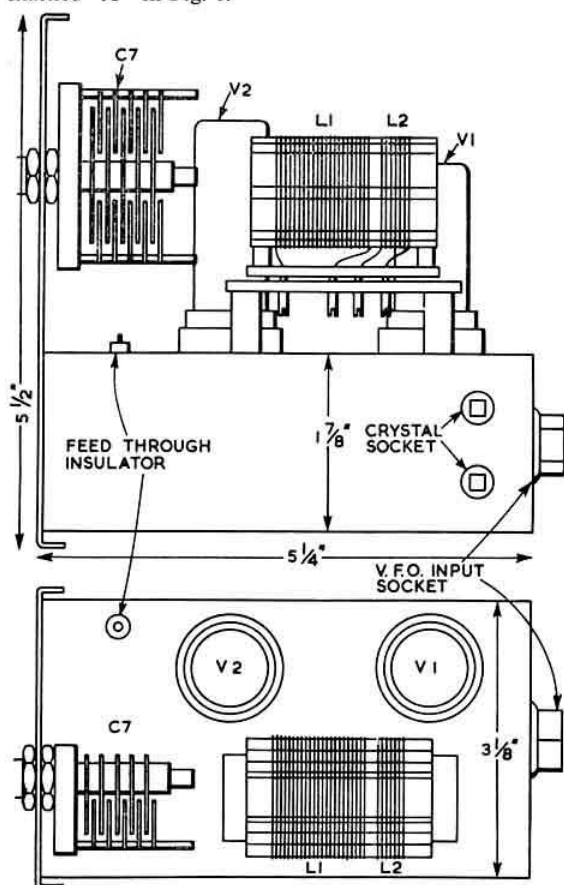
Suggested Layout of Chassis. (a) Side Elevation. (b) Plan.
